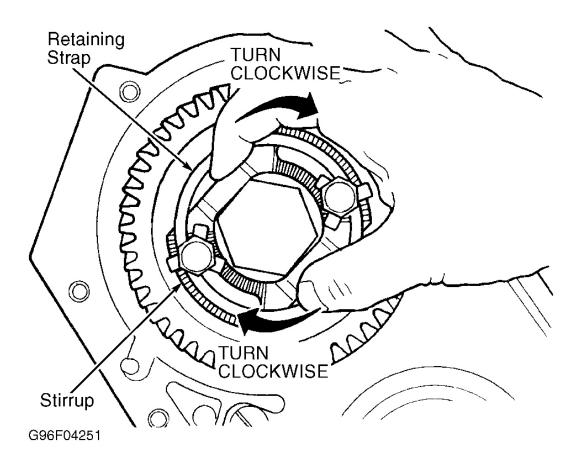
Assembling Parking Sprag Courtesy of CHRYSLER CORP.
